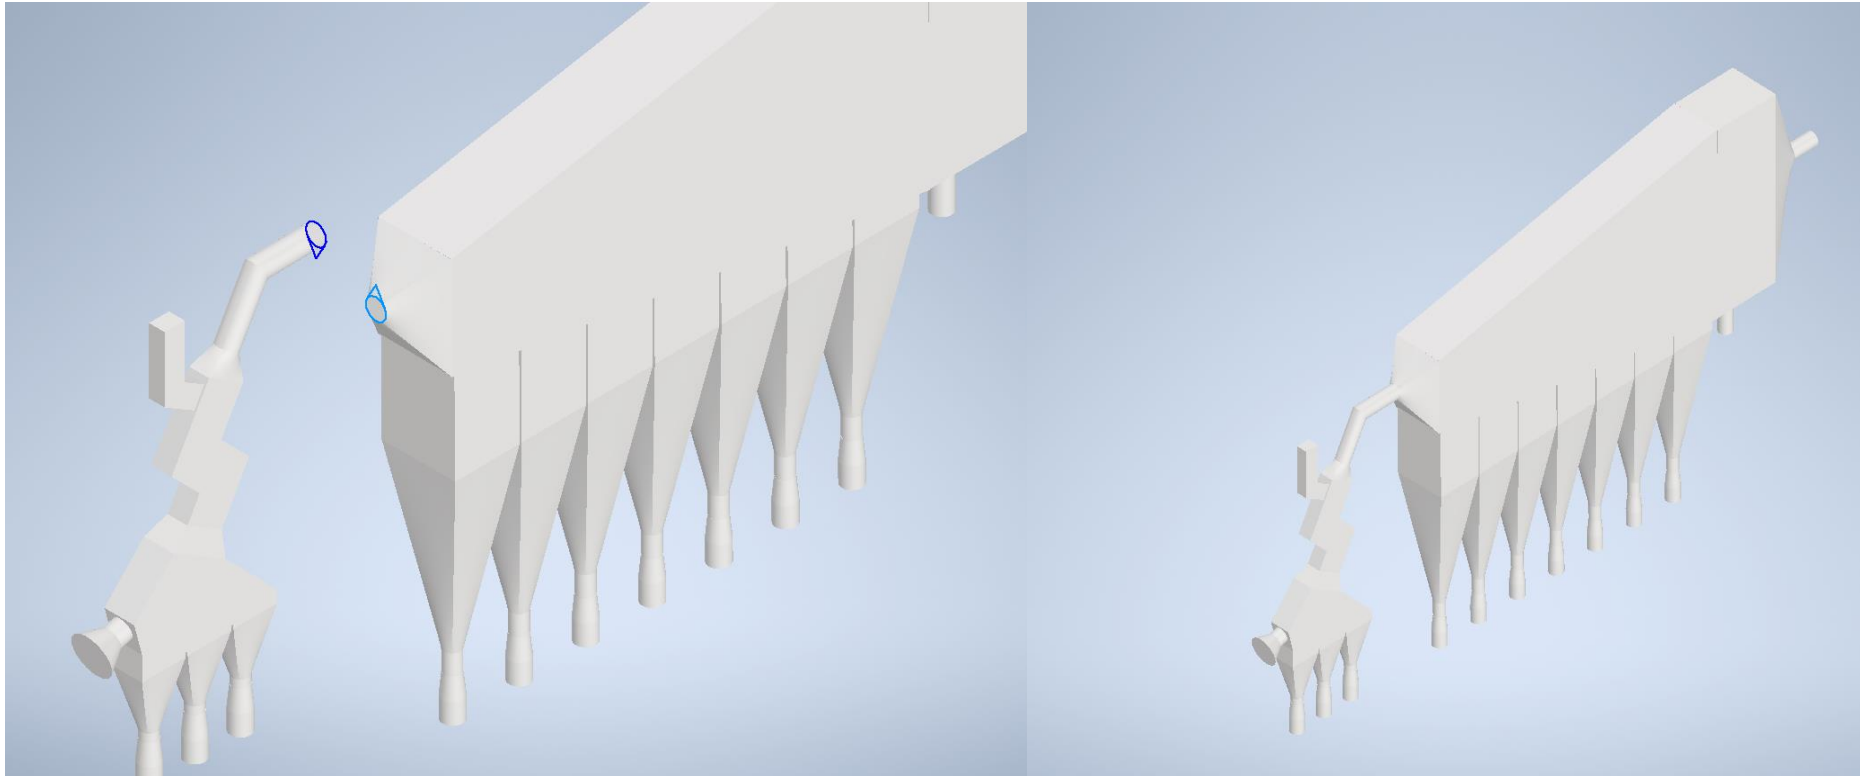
Joining the chamber 1 to the chamber 2 for the full fluid-body of the separator assembly.
